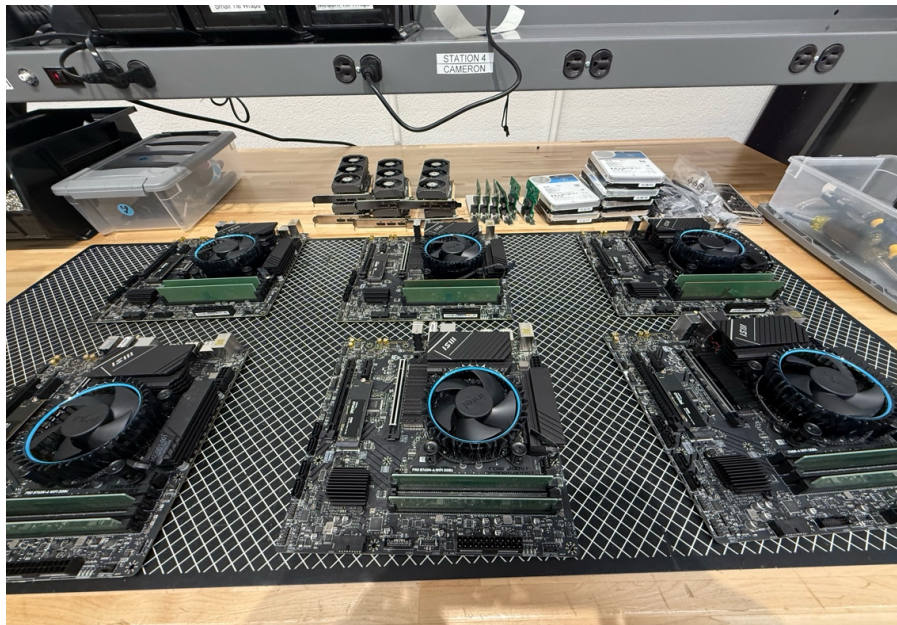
Example of motherboard assembly process completed during my internship at IP Configure.
